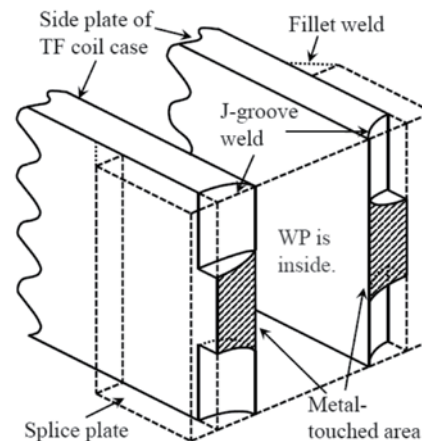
Proposal of weld groove for the bottom joint of TF coil case.
